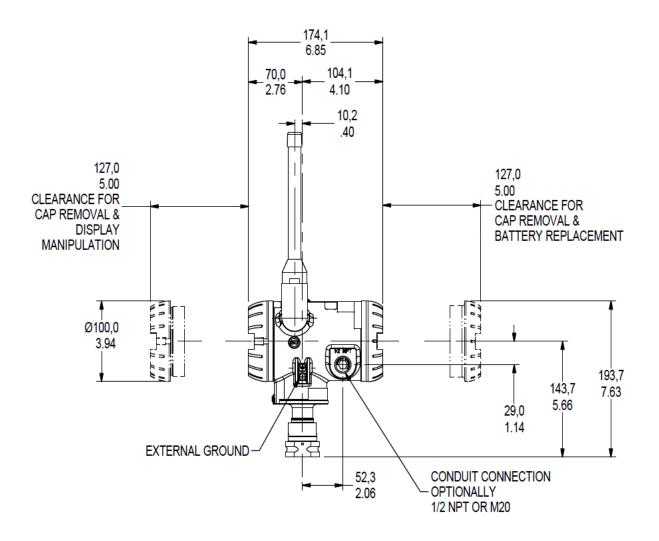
In-Line Gauge, Informational and dimensional drawing
